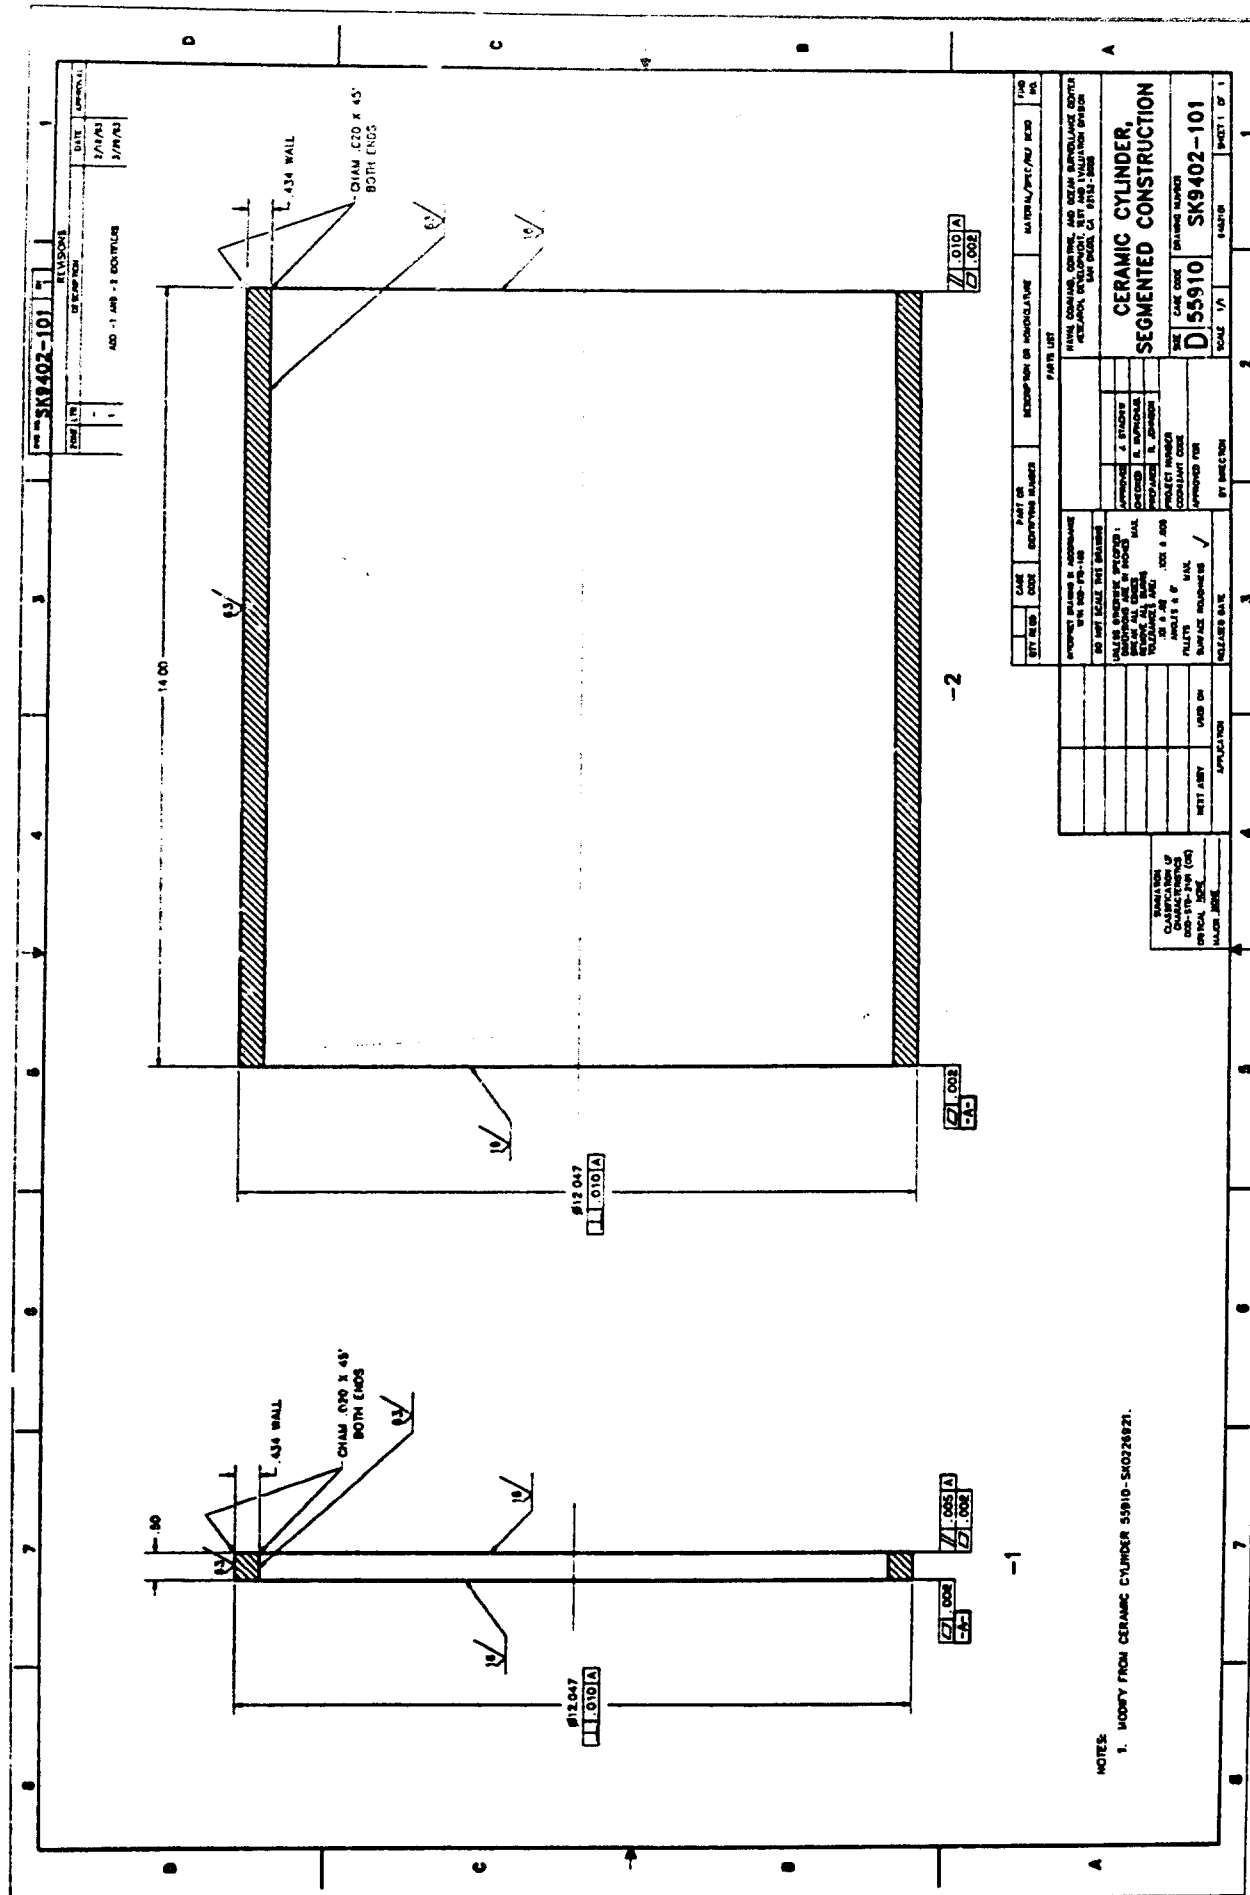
Dimensions of the ceramic components in the cylinder assembly.
